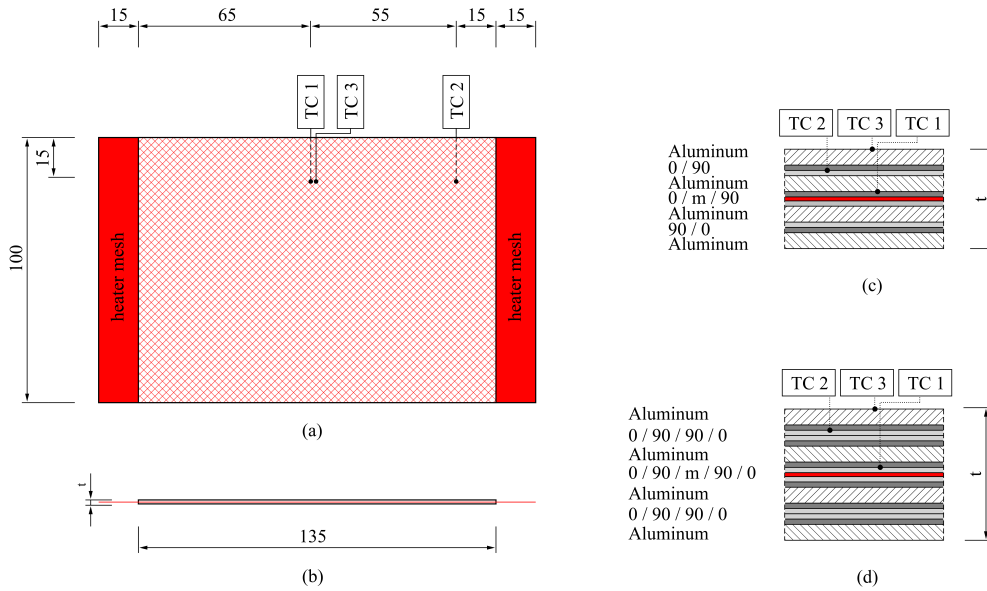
Dimensions of the full surface mesh panels: (a) Top view, (b) side view, details of (c) GLARE 3-4/3-0.3 and (d) GLARE 5-4/3-0.3 cross-sections with an integrated mesh (m). Units are in millimetres.
